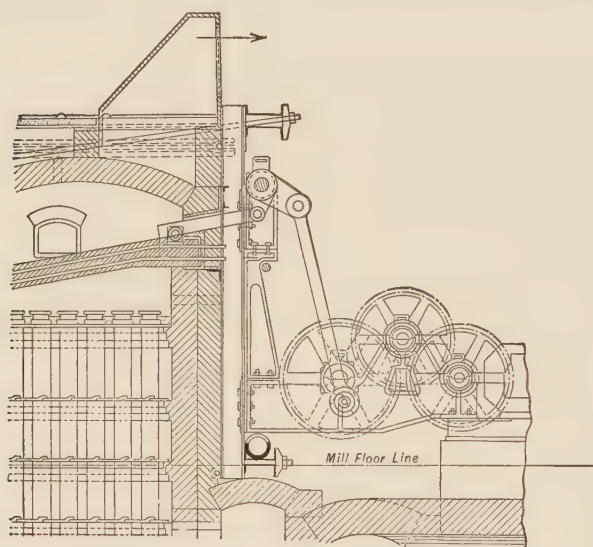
Motor-operated crank-type pusher for continuous furnace.
